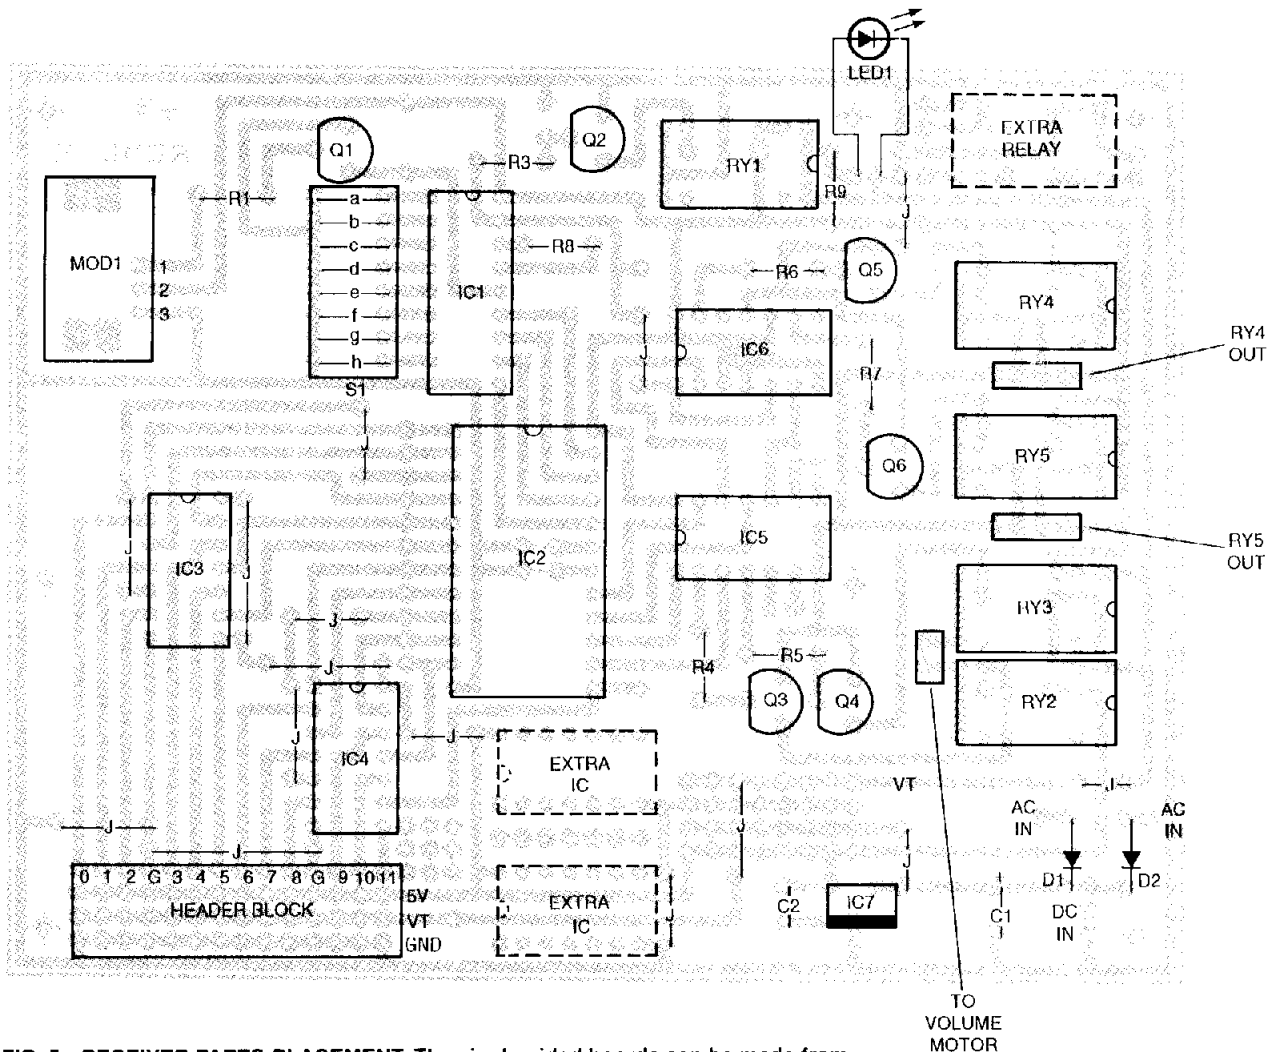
RECEIVER PARTS-PLACEMENT. The single-sided boards can be made from the foil patterns provided here.
